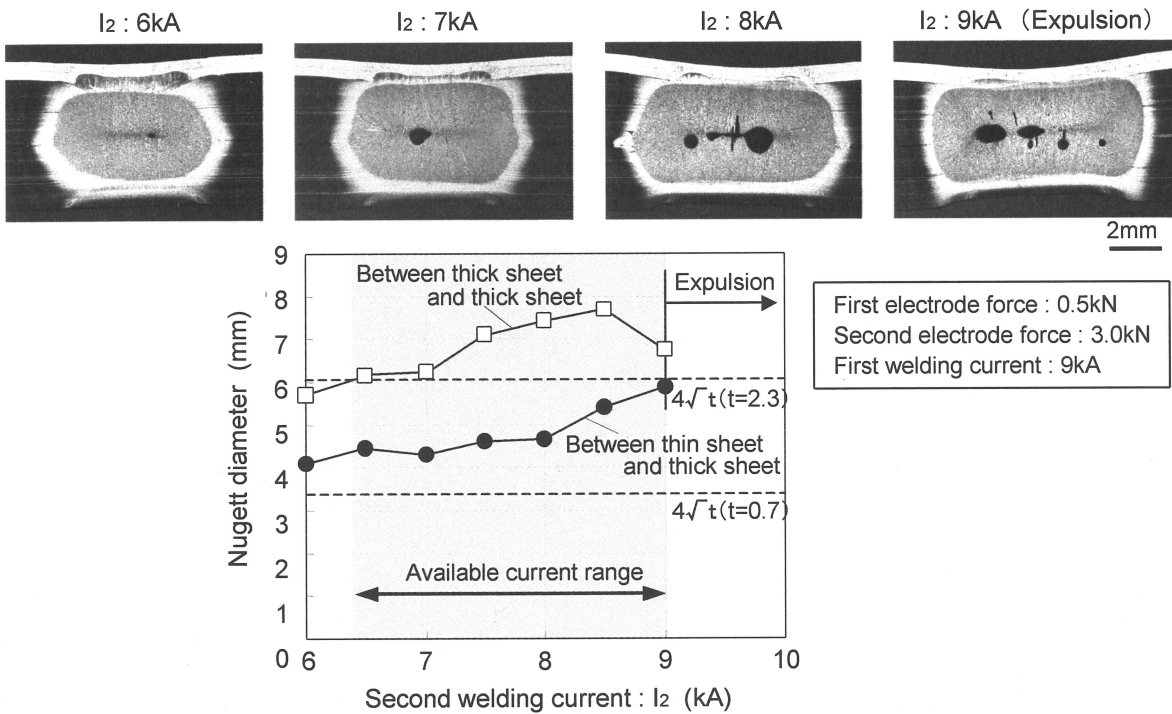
Weld lobe result and cross-sectional macros of "2-step force, 2-step current" resistance spot weld of three sheet joint (sheet joint: 0.7mmt+2.3mmt+2.3mmt; sheet thickness ratio: 7.6).
